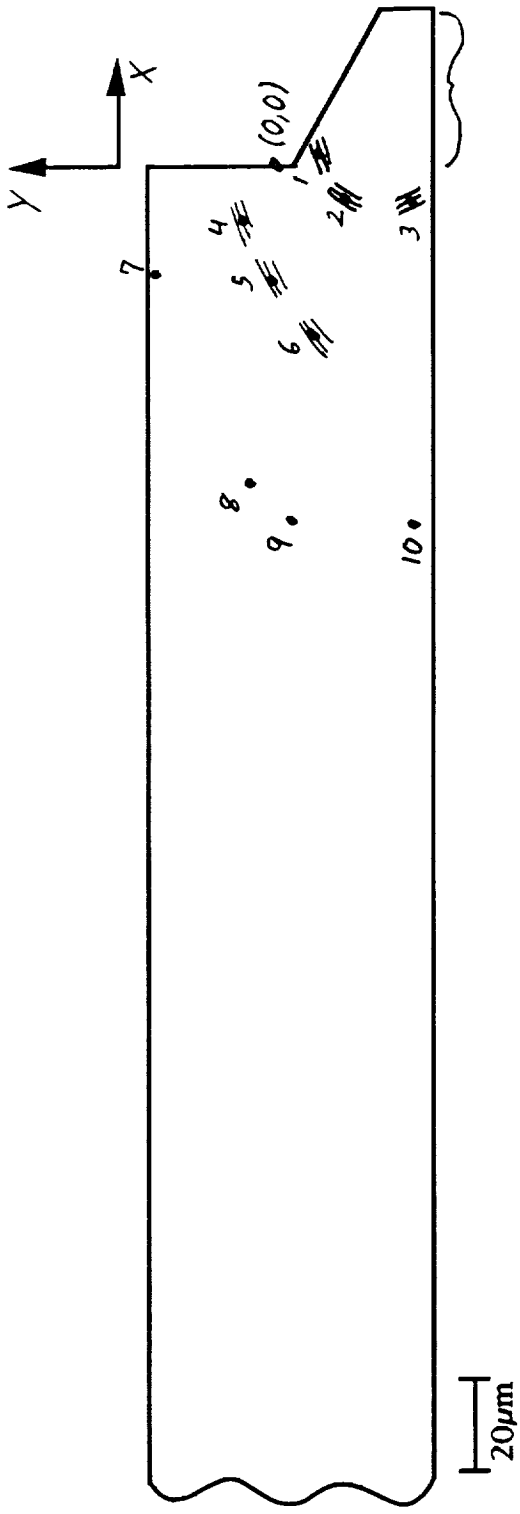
Rivet hole schematic: Upper rivet row, hole number 4J1, fatigue crack growth is in the aft direction.
